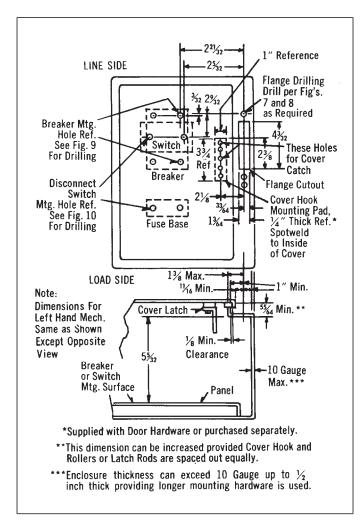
Recommended Enclosure Dimensions and Flange Cutout
